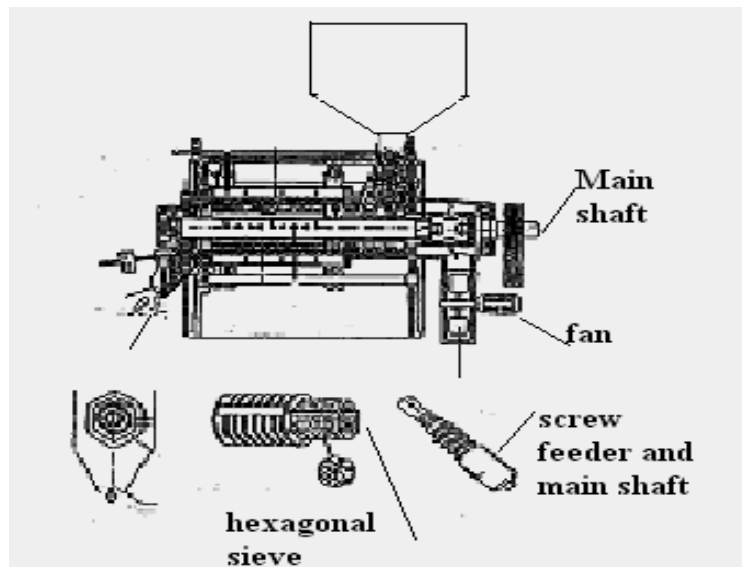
Exploded section view of N- 50 Series Jet Rice Mill (JRM)
